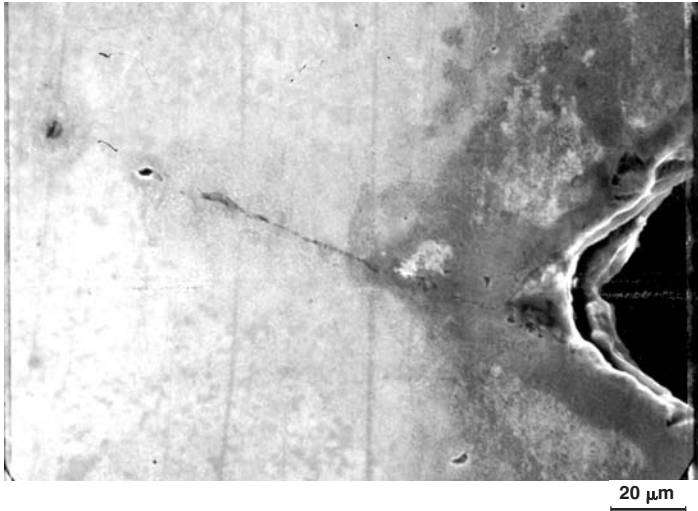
SEM photograph showing a crack emanating from the weld toe at the starboard lug
